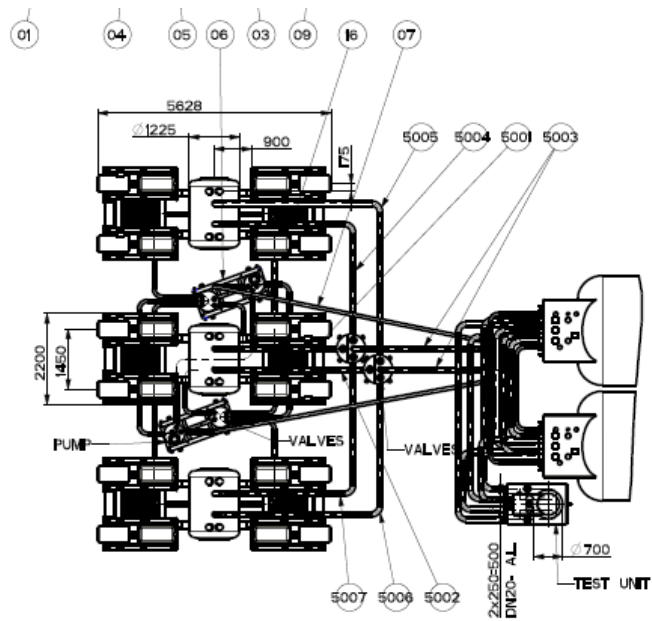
Plan view of the pipeline system connecting pumps with cylindrical tanks
